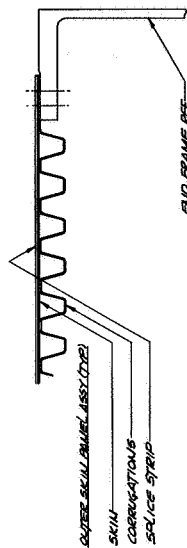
, 3. Main Rotational Frame and Arm/Counterweight Drive Frame Structural Assembly.
